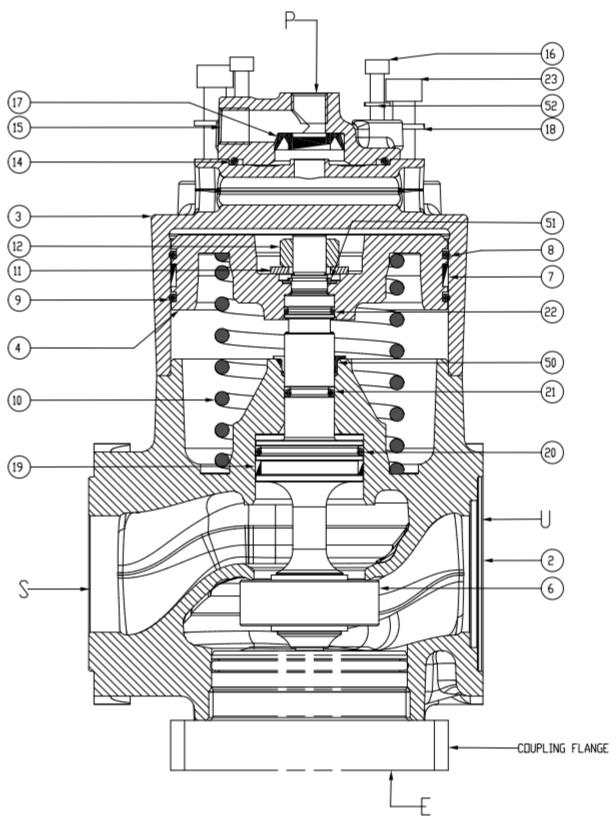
CO 3 way pneumatic valve size 2": stainless steel casting or aluminum casting
